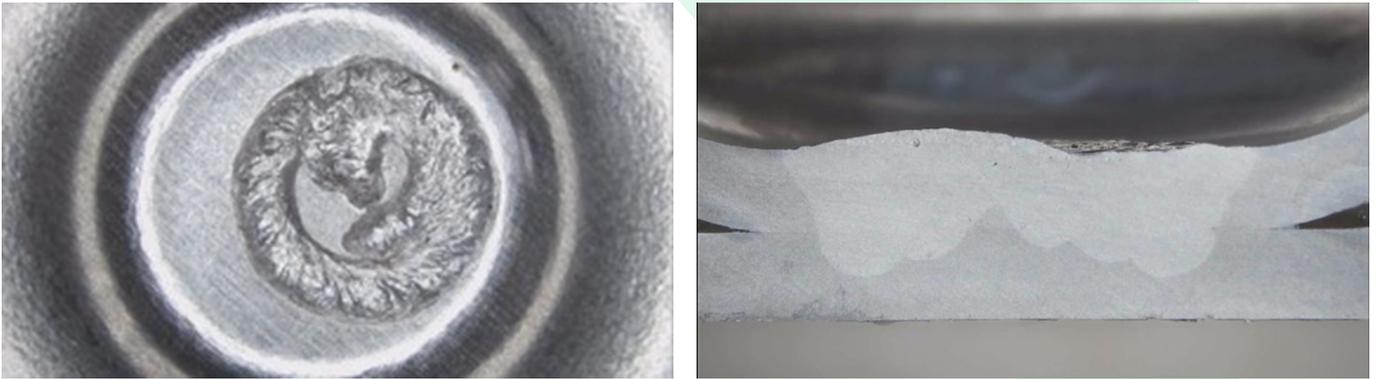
Some designs included large area welds, which caused hot cracks. By using complex beam shapes, DBL technology was able to prevent these defects.
